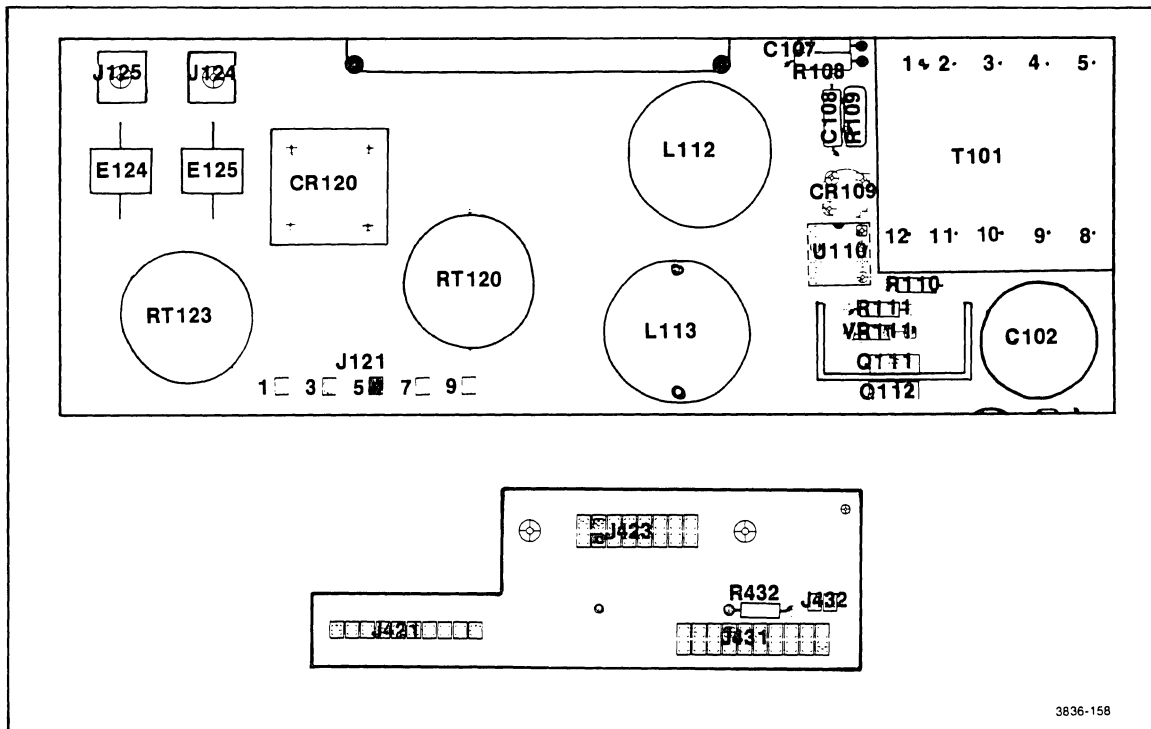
Interconnect board components are accessible when the bottom panel is removed (MONOCHROME ONLY).
